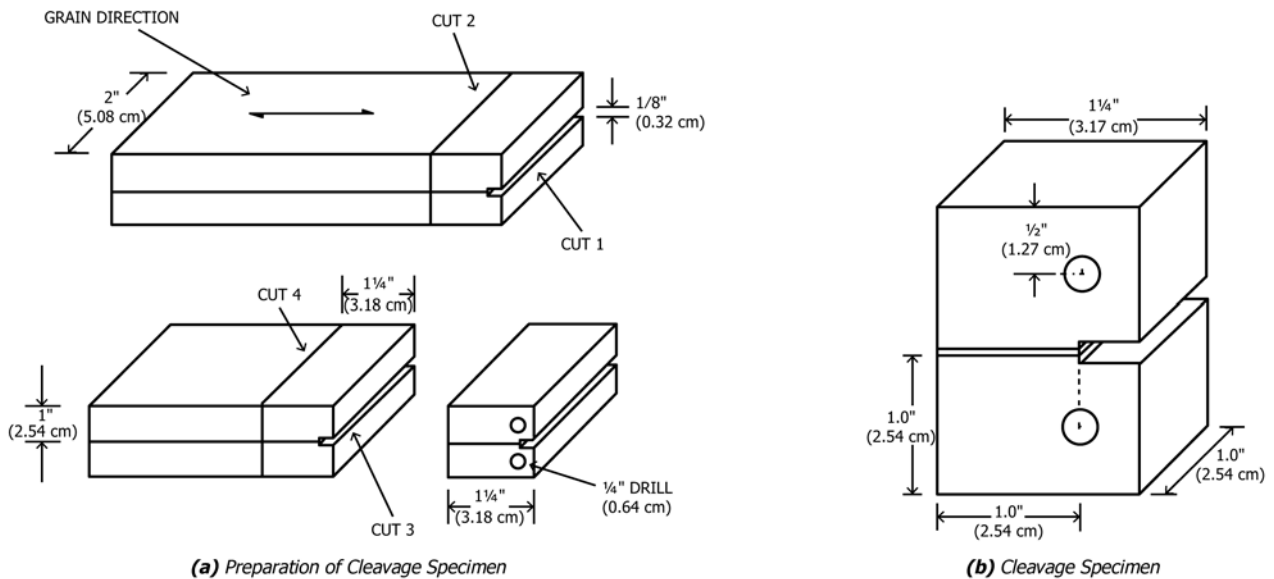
Cutting and Drilling Schematic for Cleavage Assembly
